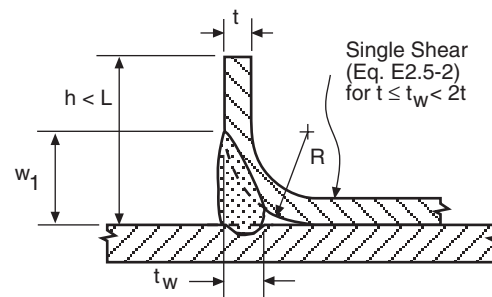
Flare Bevel Groove Weld
